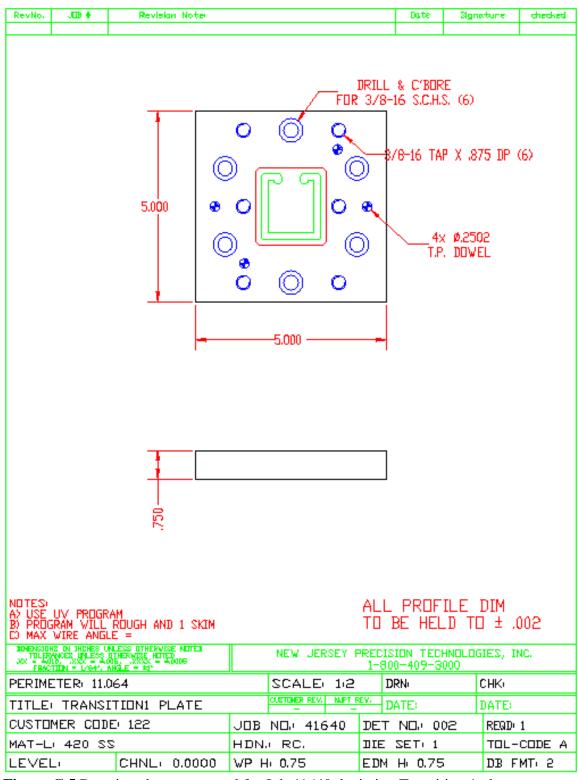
Drawing sheet generated for Job 41640 depicting Transition 1 plate.
